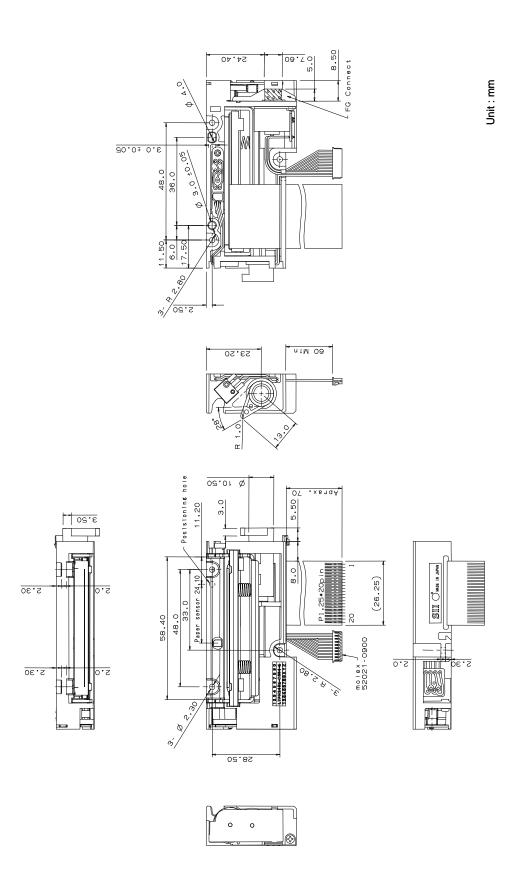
Printer Main Body Appearance and Dimensions (LTPH245E-C384-E)
